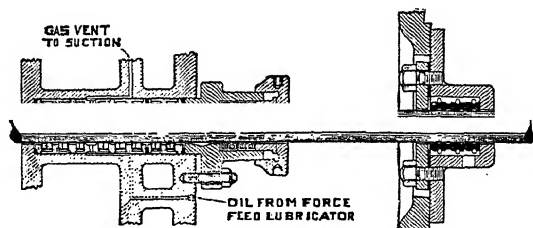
Details of metallic packing for ammonia compressor shown in Fig. 78.
